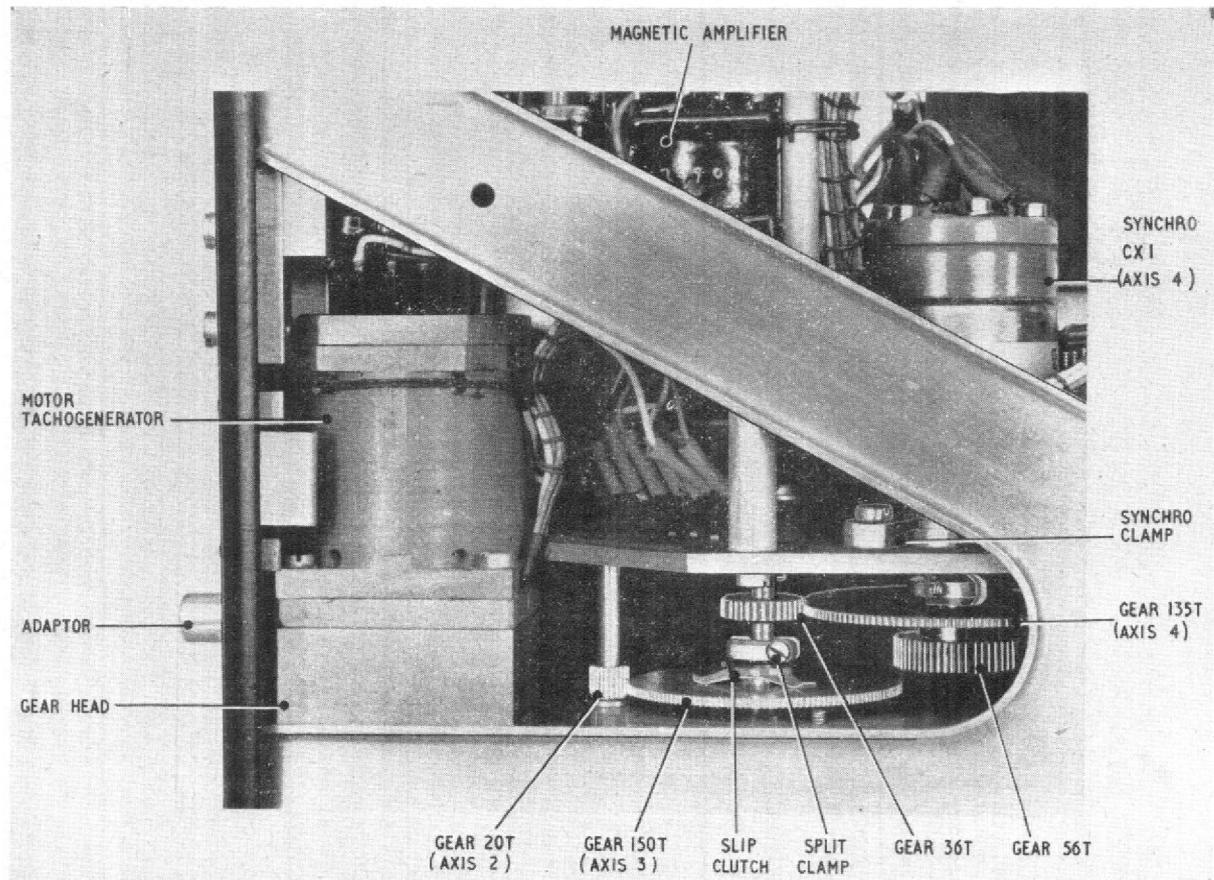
Gear train, gear head and slip clutch—pre-mod. ADS/38
